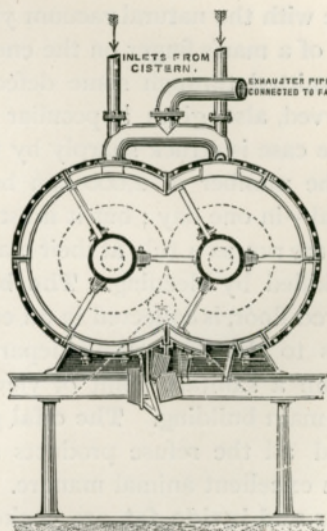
Section Elevation of Farmer's Twin Cylinder Drying Machine.
